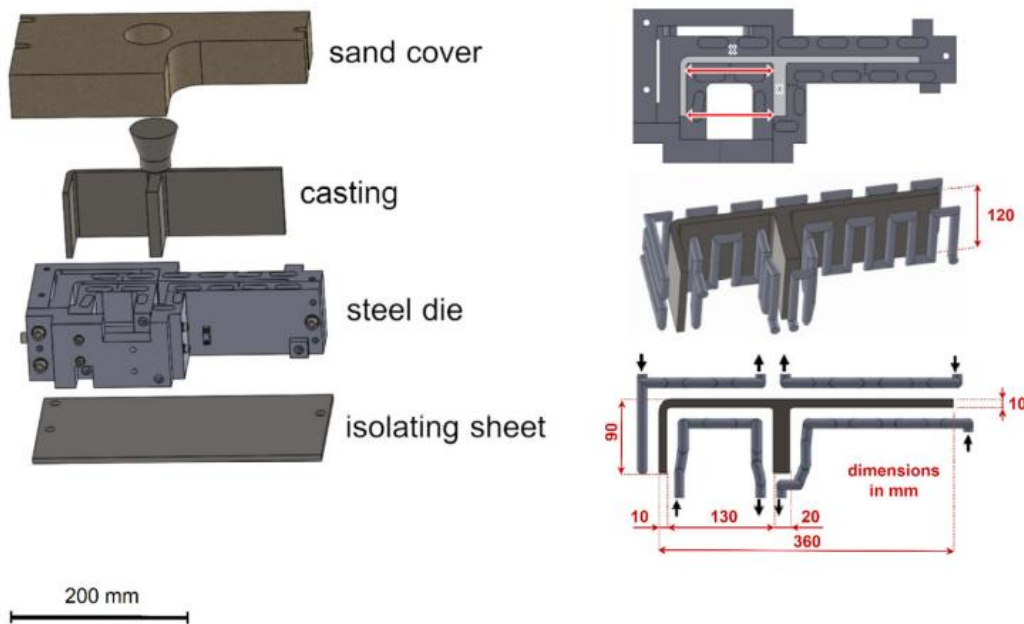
(a) Schematic of the “F”-shaped casting setup with modular die and cooling channels. (b) Dimensions and distortion measurement positions [6].
